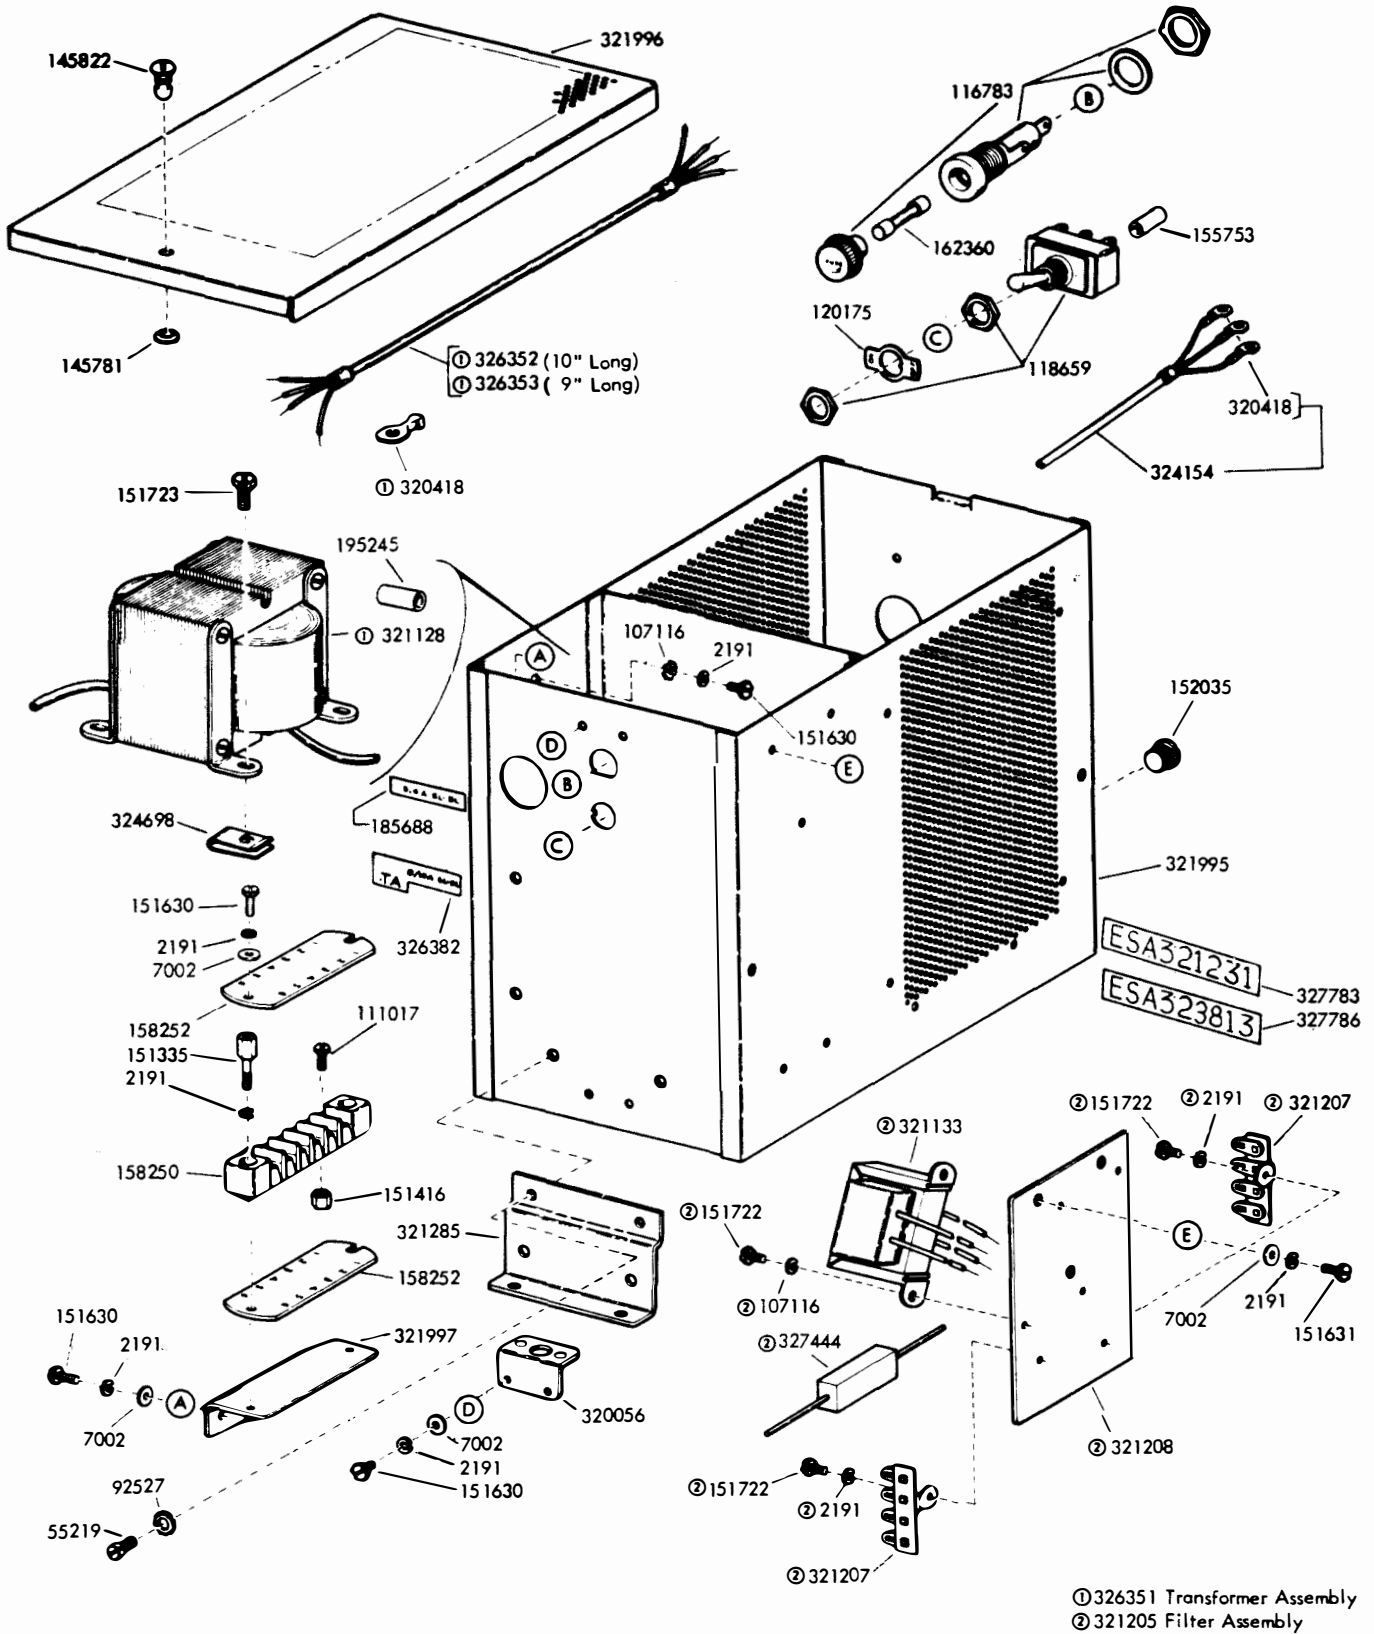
Electrical Service Assemblies 321231 and 323813 (Sheet 1 of 2)
